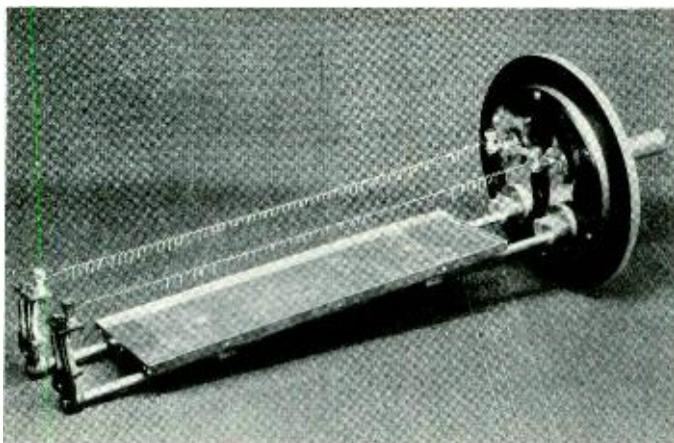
Tray carrier and heating filaments for vapor plating machines. A complete machine is shown in Figure 3
